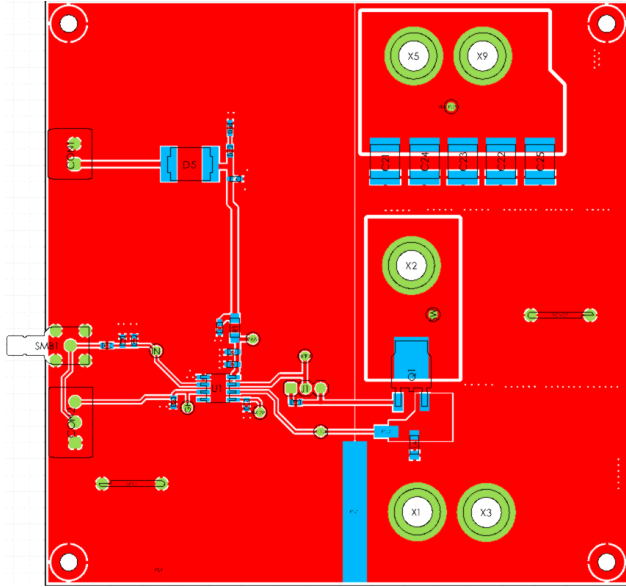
FAD1101 EVB PCB Top Composite Drawing
